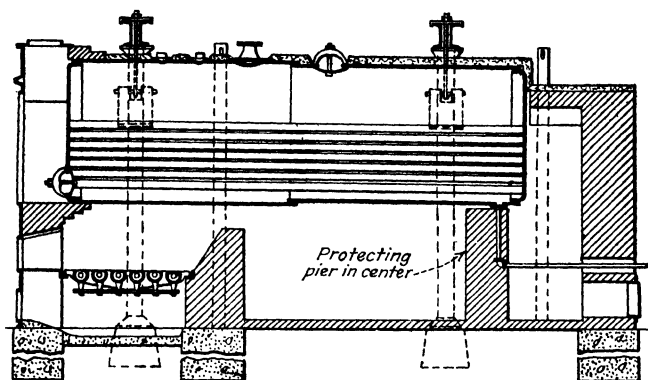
Horizontal-return-tubular boiler. (Kewanee Boiler Corporation.)
